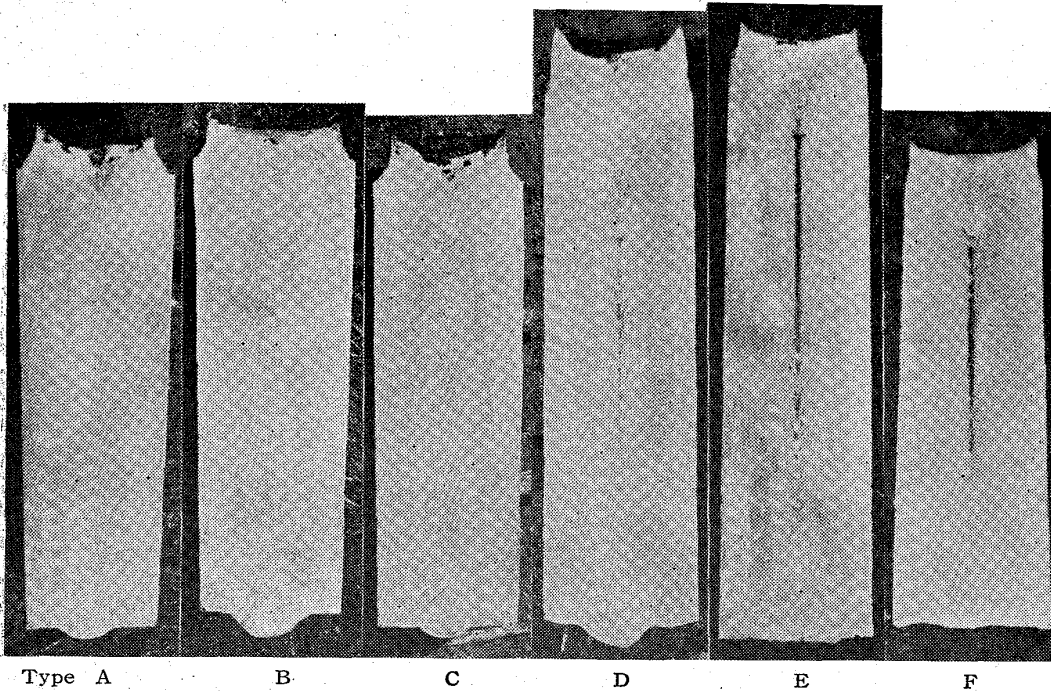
Macrostructure of longitudinal cross section of test ingots.
